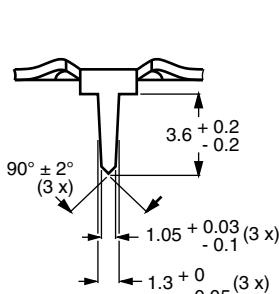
Mounting hole diagram and outline; Form MR: With mounting ring and pins
